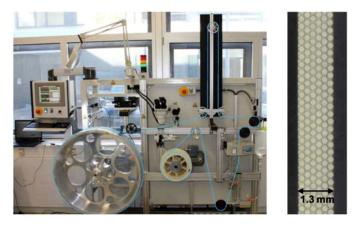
Left: picture of the custom designed mat winding machine. Right: cross section of a fibre mat.
